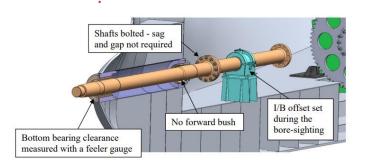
Aft stern tube bottom clearance measurements in installations with no forward stern tube bearing, ABS [12]
